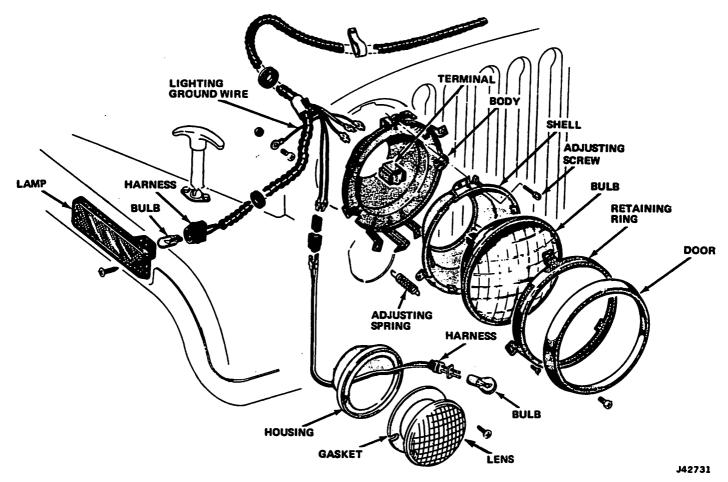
R-5 Headlamp, Parking, Directional and Side Marker Lamps—CJ and Scrambler Models
